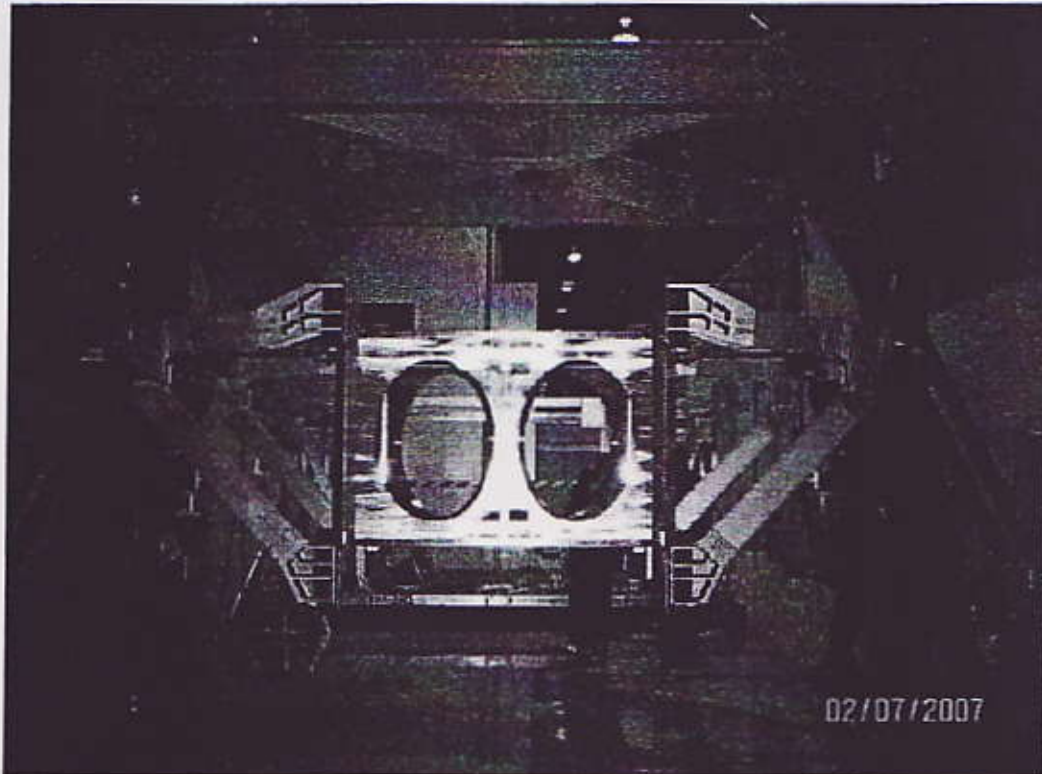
Rotating Assembly Stand (RAS) with AMS USS & Assembly Fixture and PLF and downslings above.
